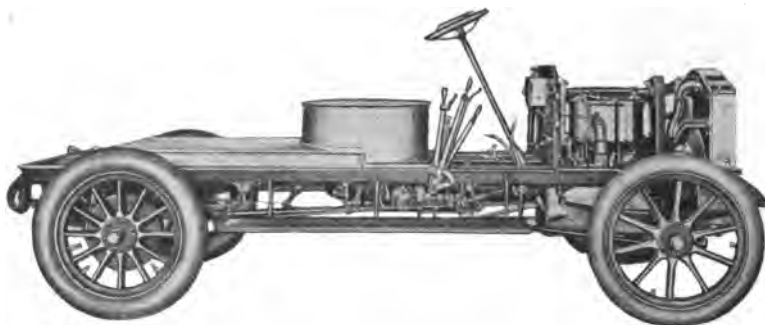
Chassis of White Steamer, Showing Power Plant.
